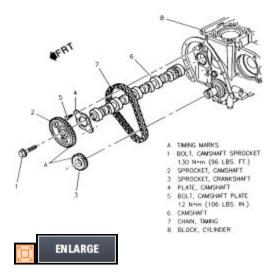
Exploded view of the timing chain and sprockets-2.2L OHV engine
